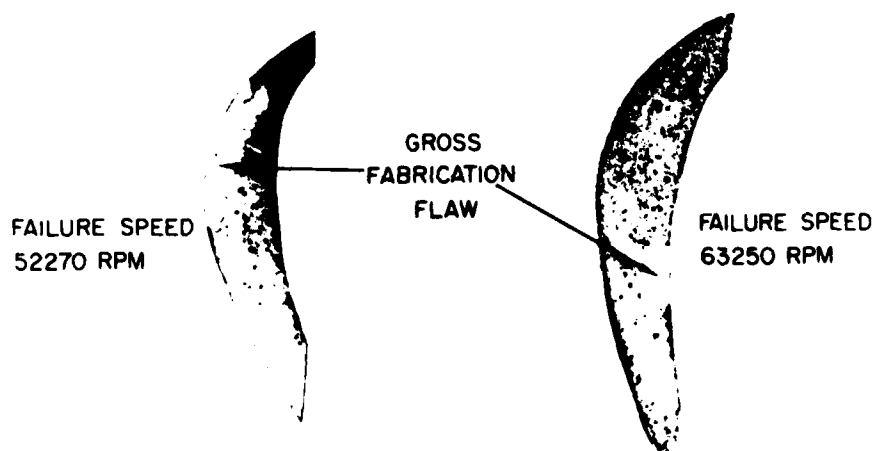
Typical Fracture Surfaces with Gross Fabrication Flaws
